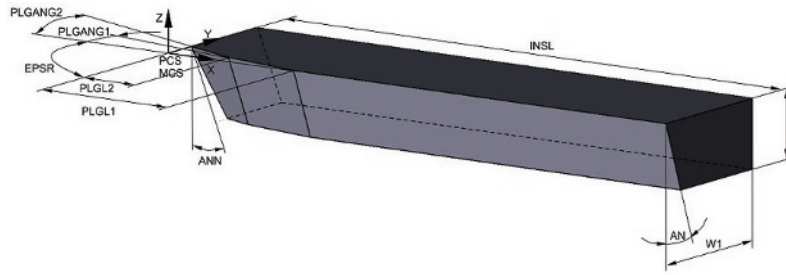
Detailed geometry of a reaming insert with one cutting edge and double plug chamfer
